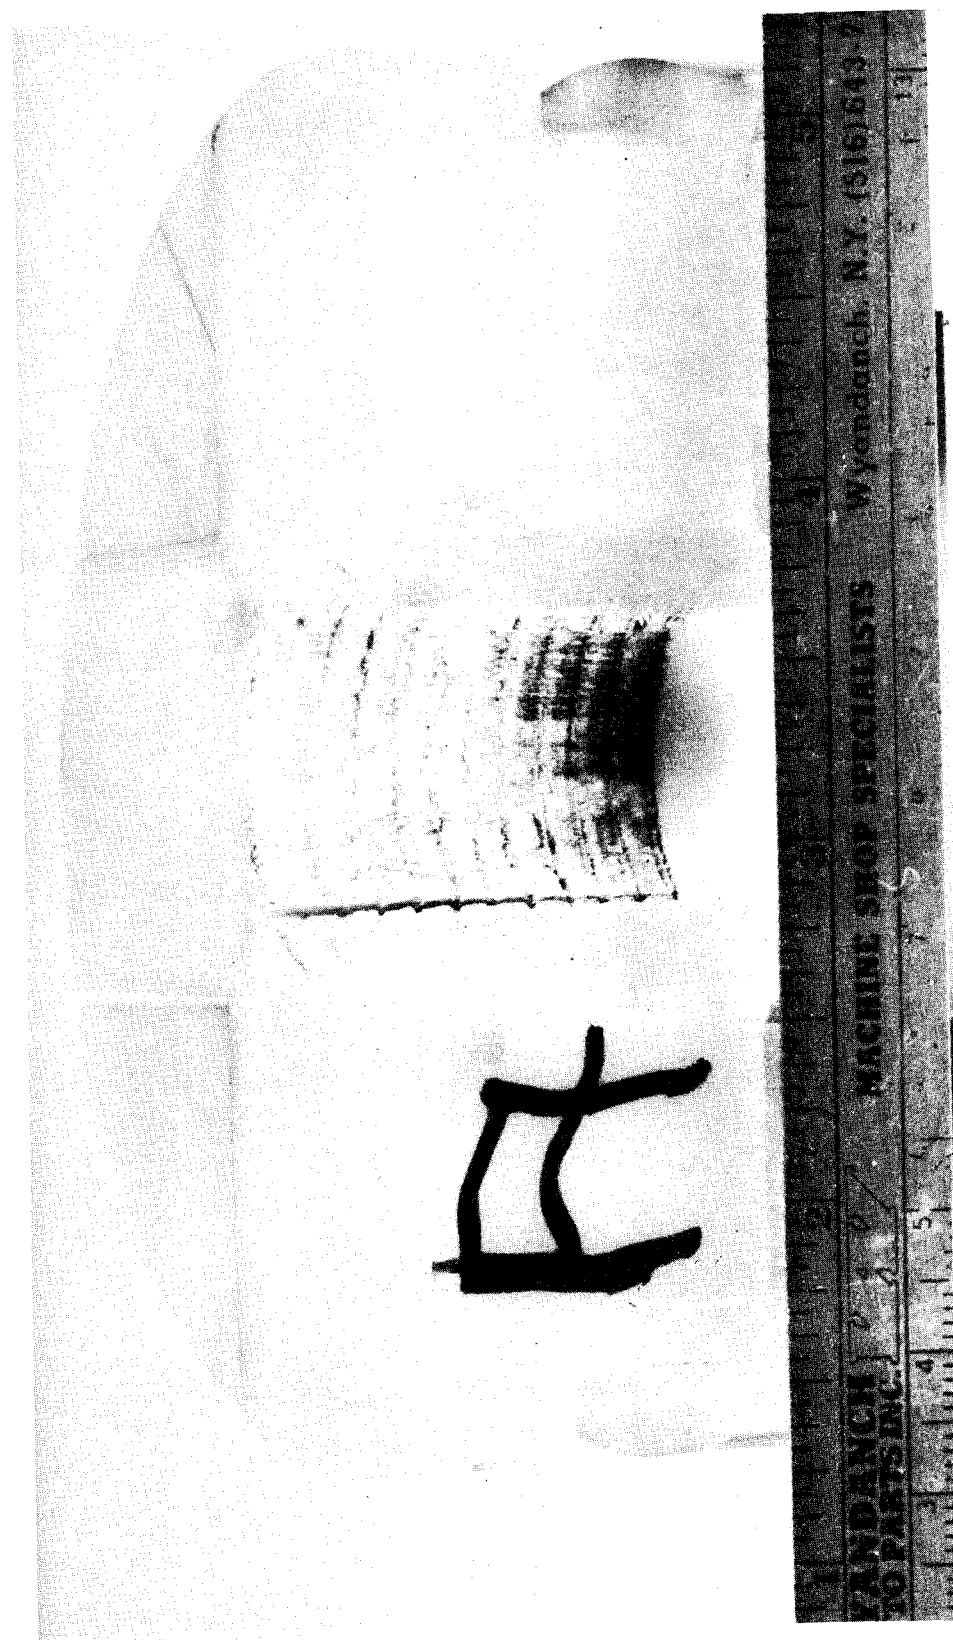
TEST SPECIMEN AFTER TEST, SHOWING
